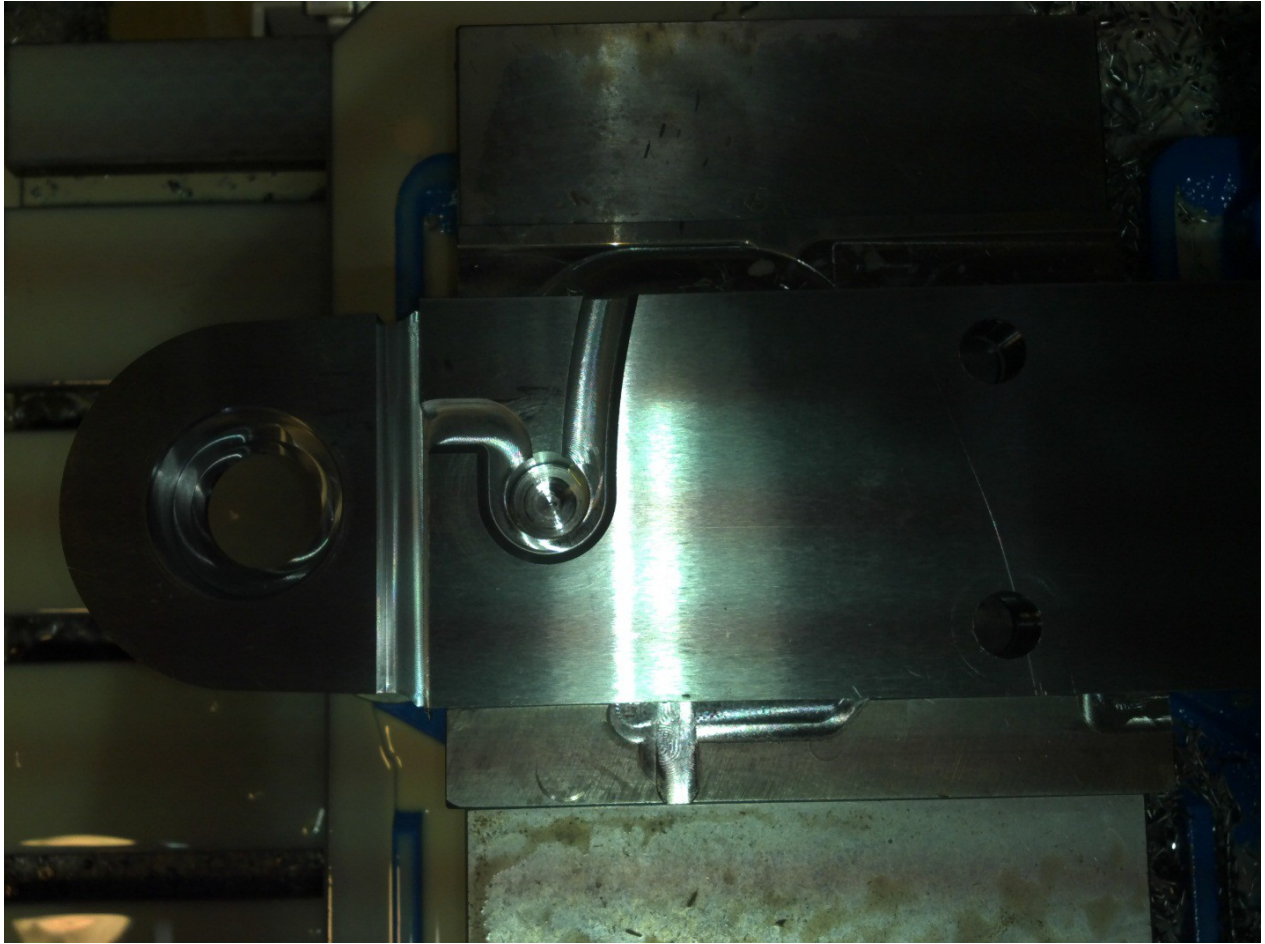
Horizontal Crossbar being machined at Tilton Engineering.
